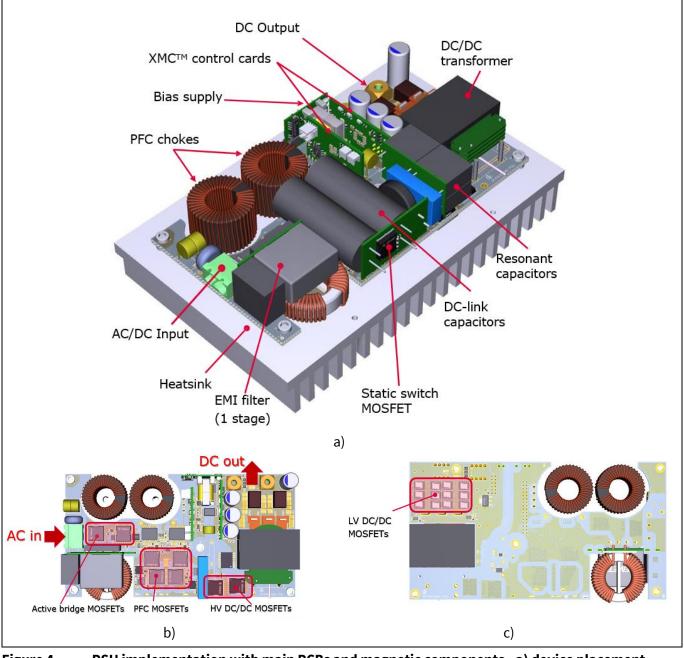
PSU implementation with main PCBs and magnetic components - a) device placement view, b) top view, and c) bottom view
